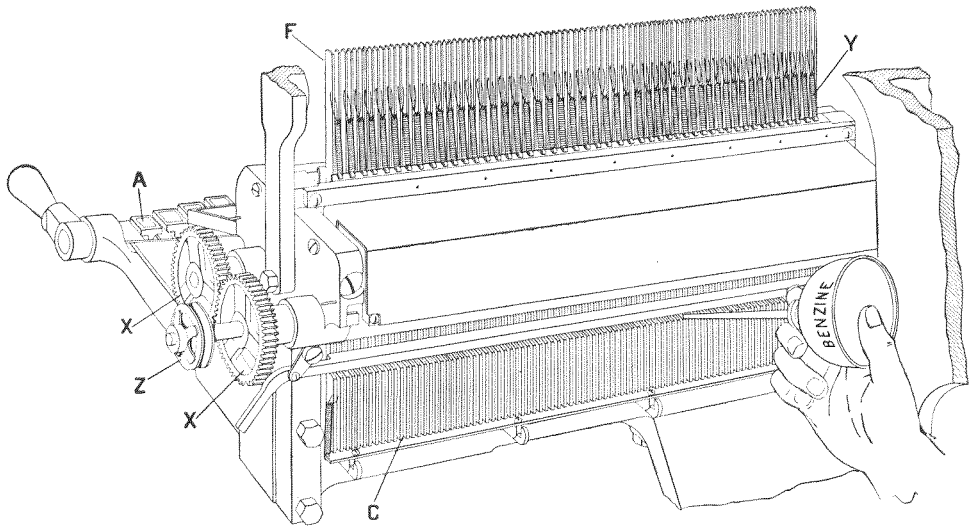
Rear view of the keyboard mechanism. *A*, keybutton; *C*, keyboard bar; *F*, keyreed; *X-X*, keyboard cam roll spur gears, which drive the keyboard rubber rolls; *Y*, keyreed spring; *Z*, keyboard cam pulley. This figure also shows the method of applying benzine to clean the keyboard bars.
